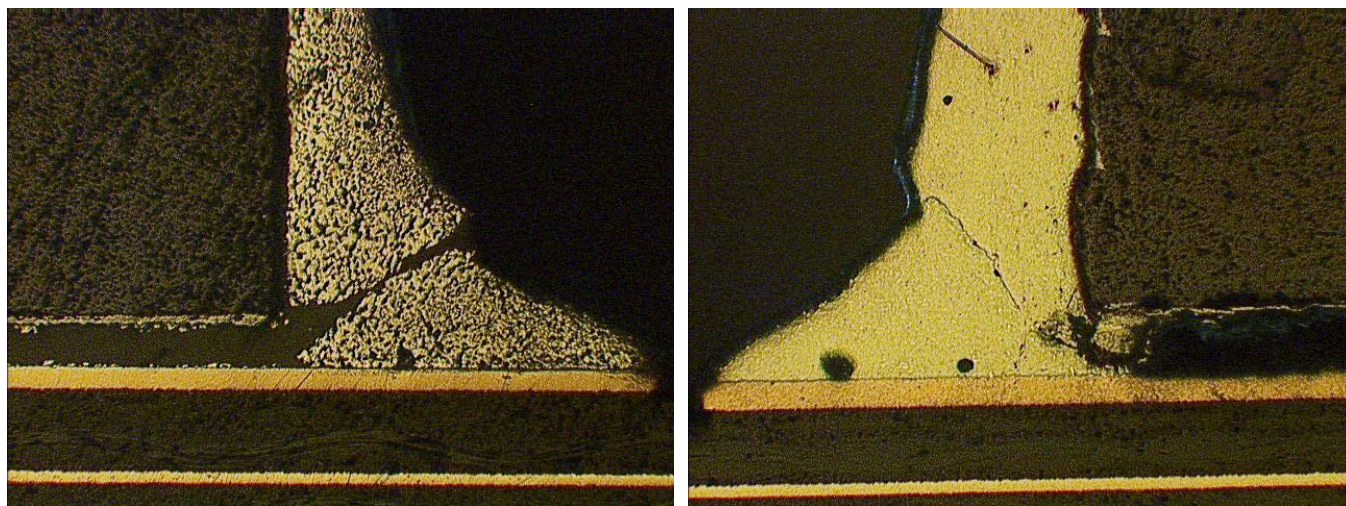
CLCC-20 Solder Joints, Left - Board 5, Component U14, SnPb/SnPb, Failed @ 2625 Cycles; Right - Board 43, Component U14, SAC305/SAC305, Failed @ 513 Cycles
